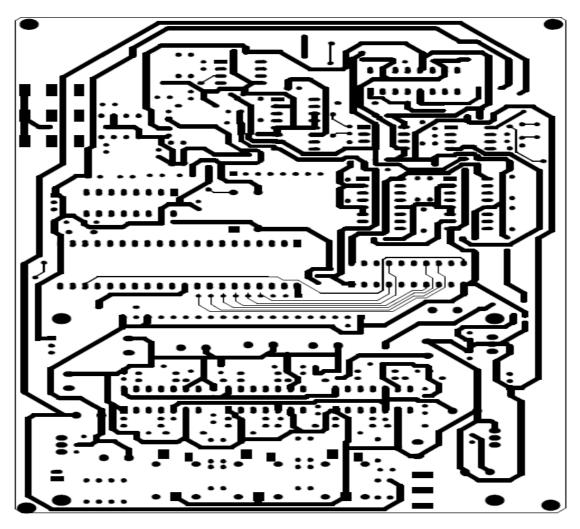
Bottom side of the microcontroller based aduiometer PCB -1(17 cm \times 11.22 cm).
